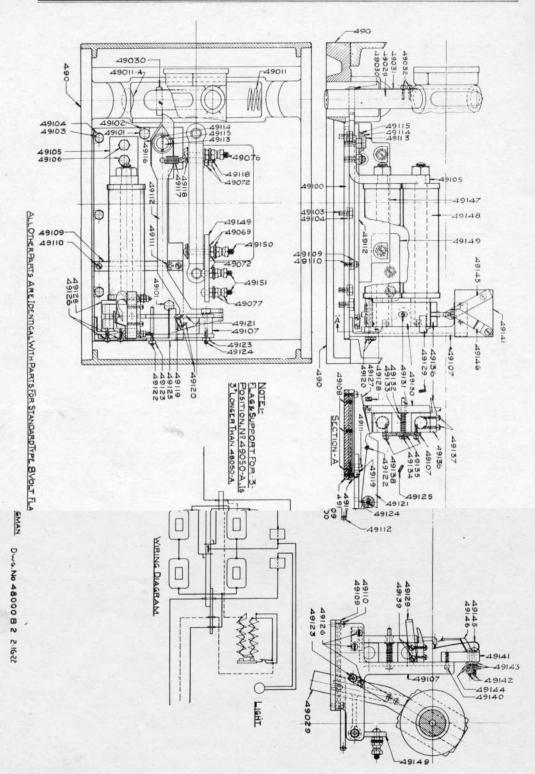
Assembly Type KC-8 Magnetic Flagman with Type OA-8 Auxiliary "Out-of-Order" Signal.
